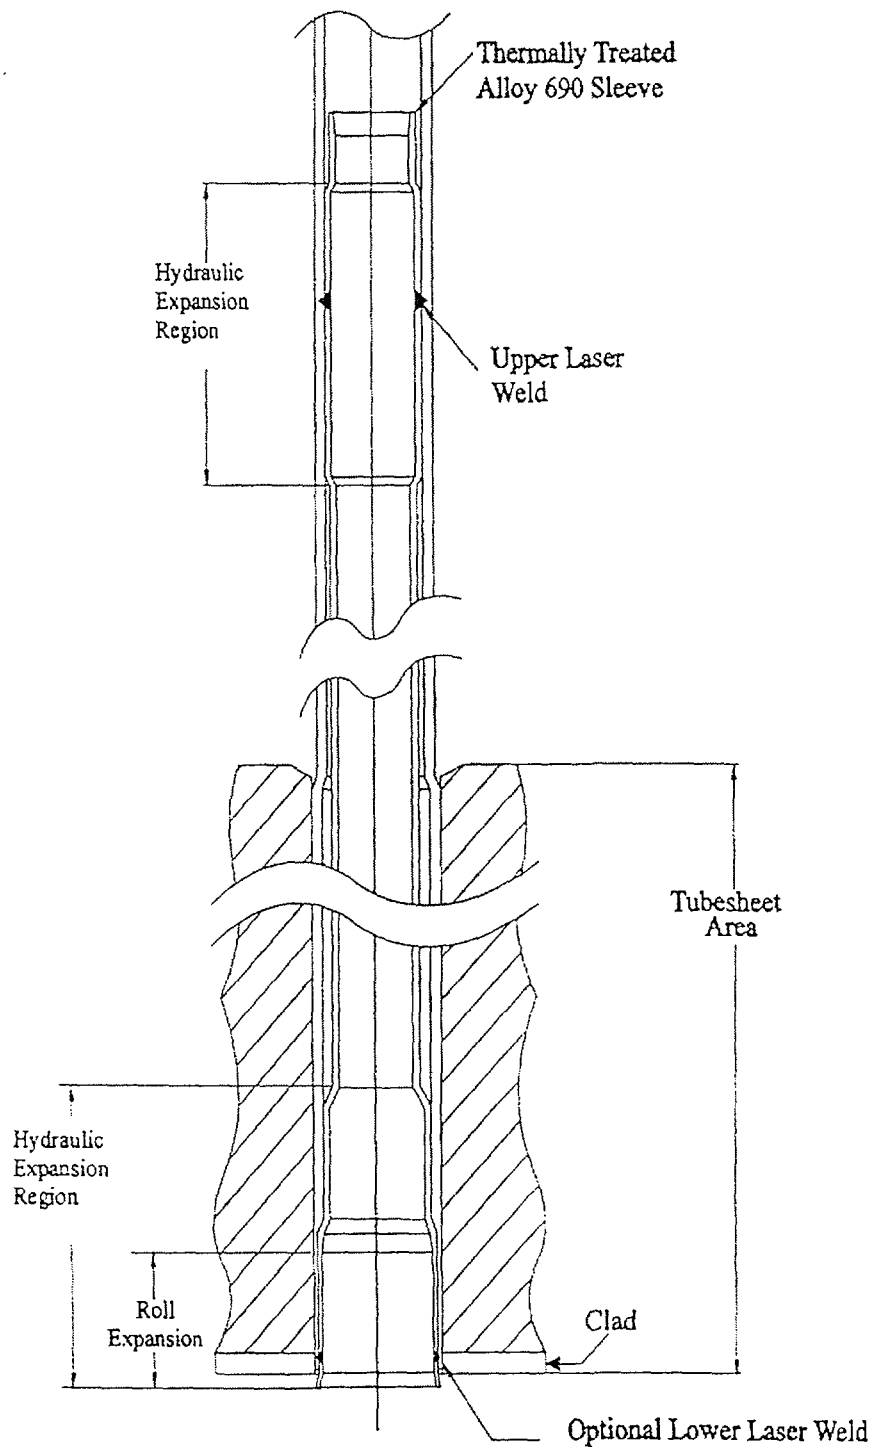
Westinghouse Laser Welded Tubesheet Sleeve Installation.
